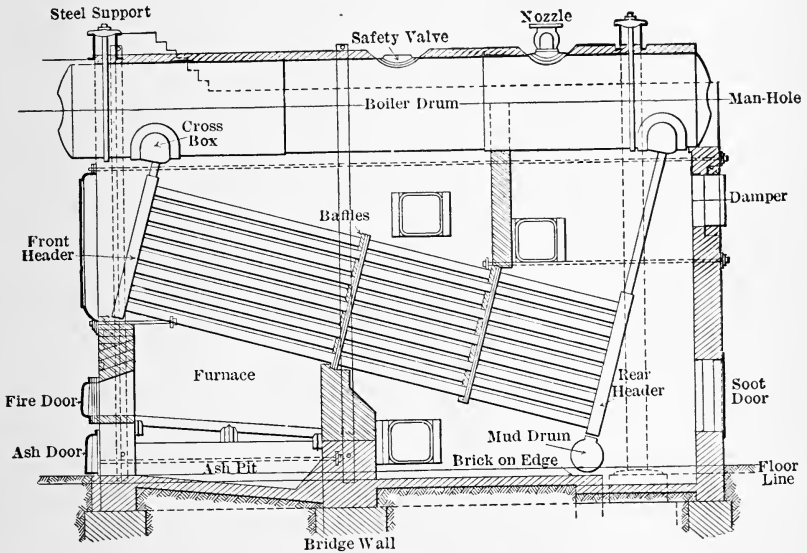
Babcock & Wilcox Boiler and Standard Hand-fired Setting.
